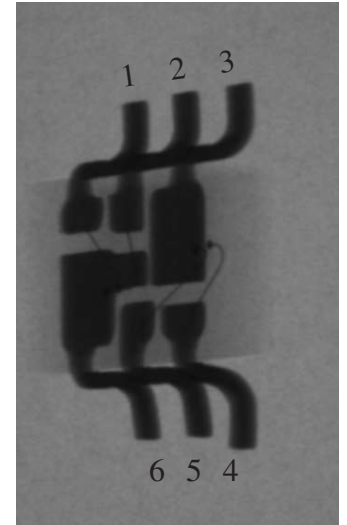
Oblique angle x-ray image of good part indicating a typical wire bonding
